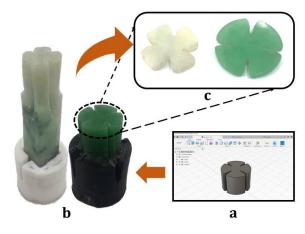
Marble was machined by CNC machine; a. 3D design on CAD; b. Rough products; c. Polished products
